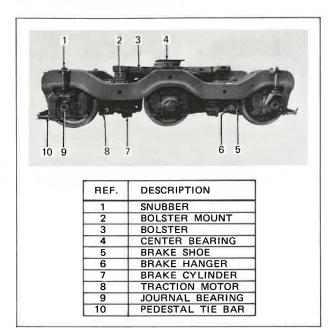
TYPICAL TRUCK ASSEMBLY (WITH 12 X 4 BRAKE CYLINDER).
